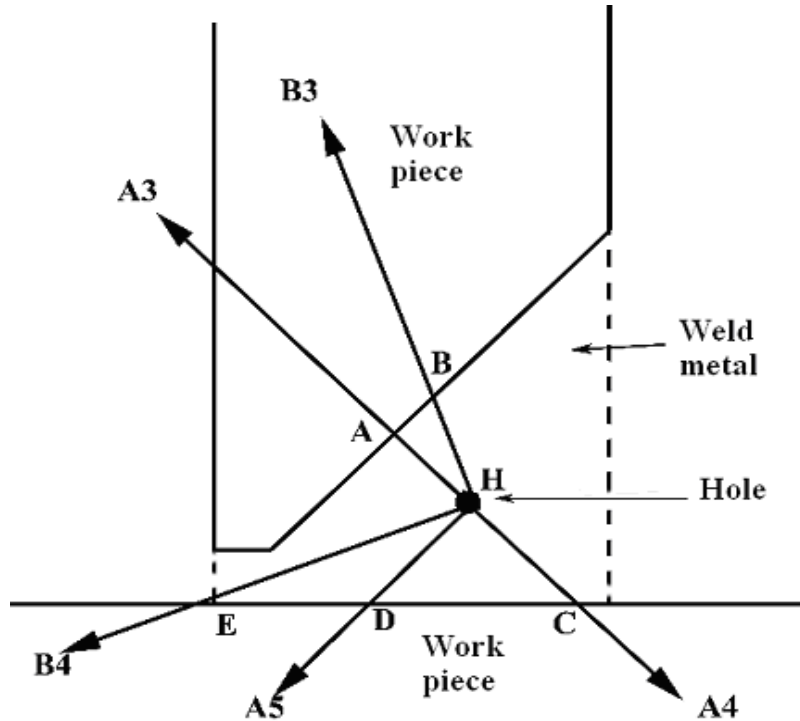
The probe positions and sound paths in the ultrasonic test of the weld metal hole.
